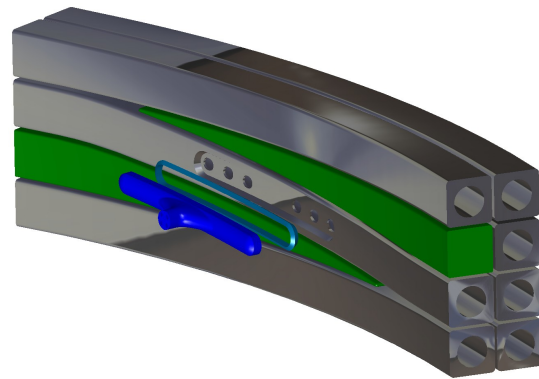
Optimized inlets in the ITER CS, showing also the cover plate and the weld
